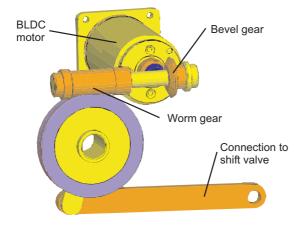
Actuator: DC motor and a gear reduction of 1:200.
